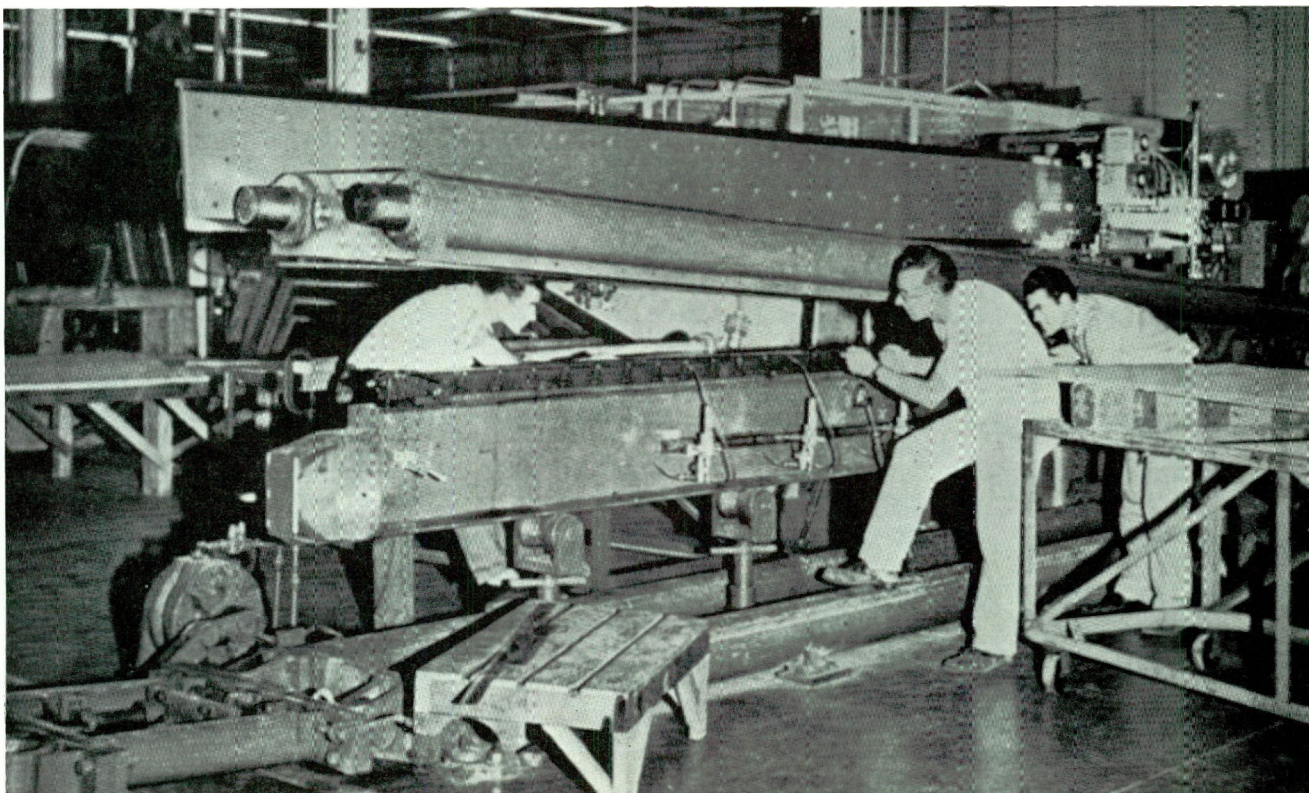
WELD POSITIONER USED IN FABRICATION OF
